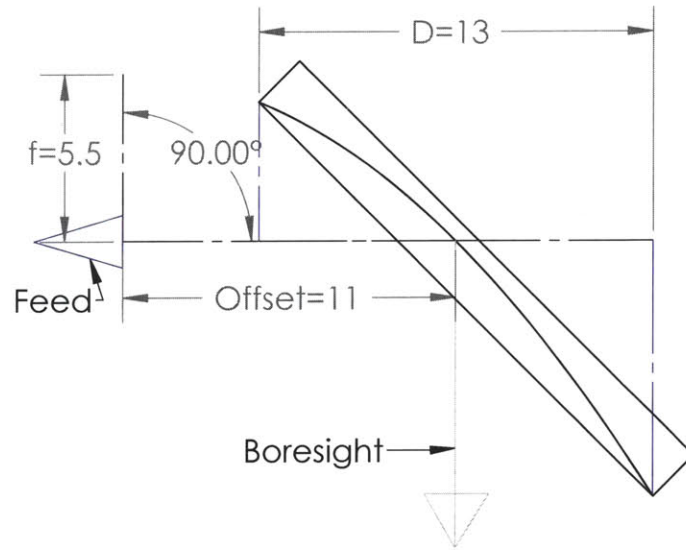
Profile drawing of the parabolic reflector (all dimensions are in centimeters).
